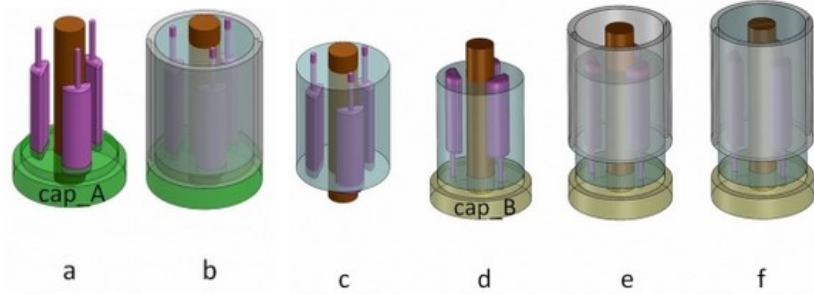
molding process of MOLLUSC manipulator, (a, b) the first part of molding, (c-f) the second part of molding [43]
